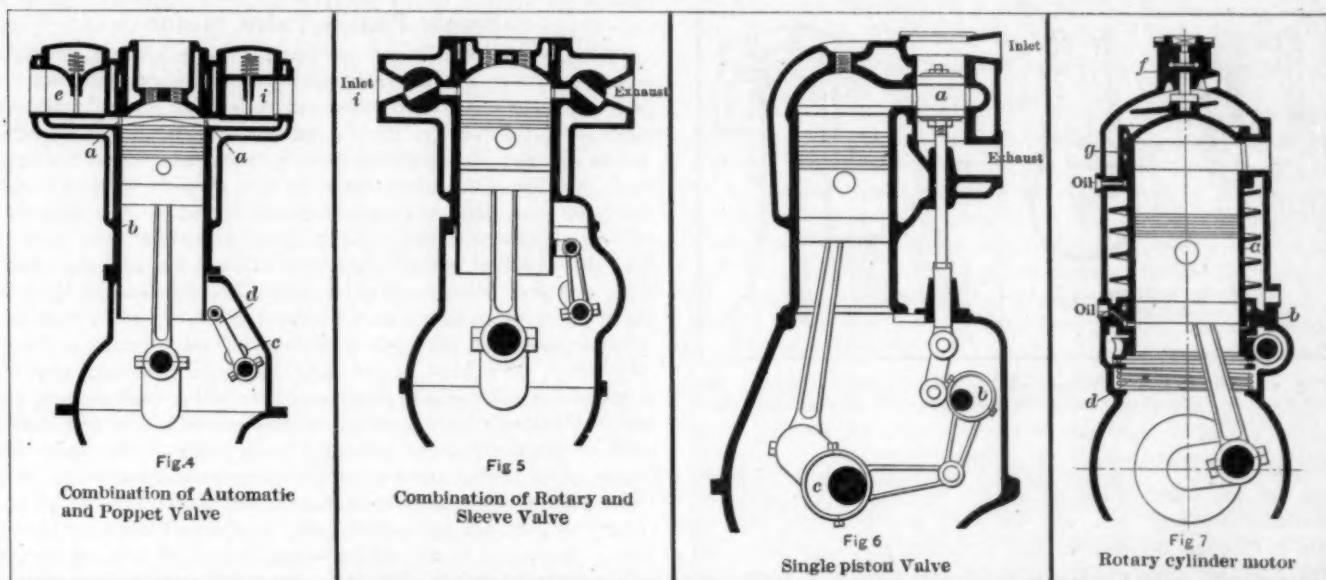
Section of a motor with a combination automatic and poppet valve. Fig. 5—Section of a cylinder, showing a combination rotary and sleeve valve. Fig. 6—Section of a cylinder showing a single piston valve. Fig. 7—Section of a rotary cylinder motor
